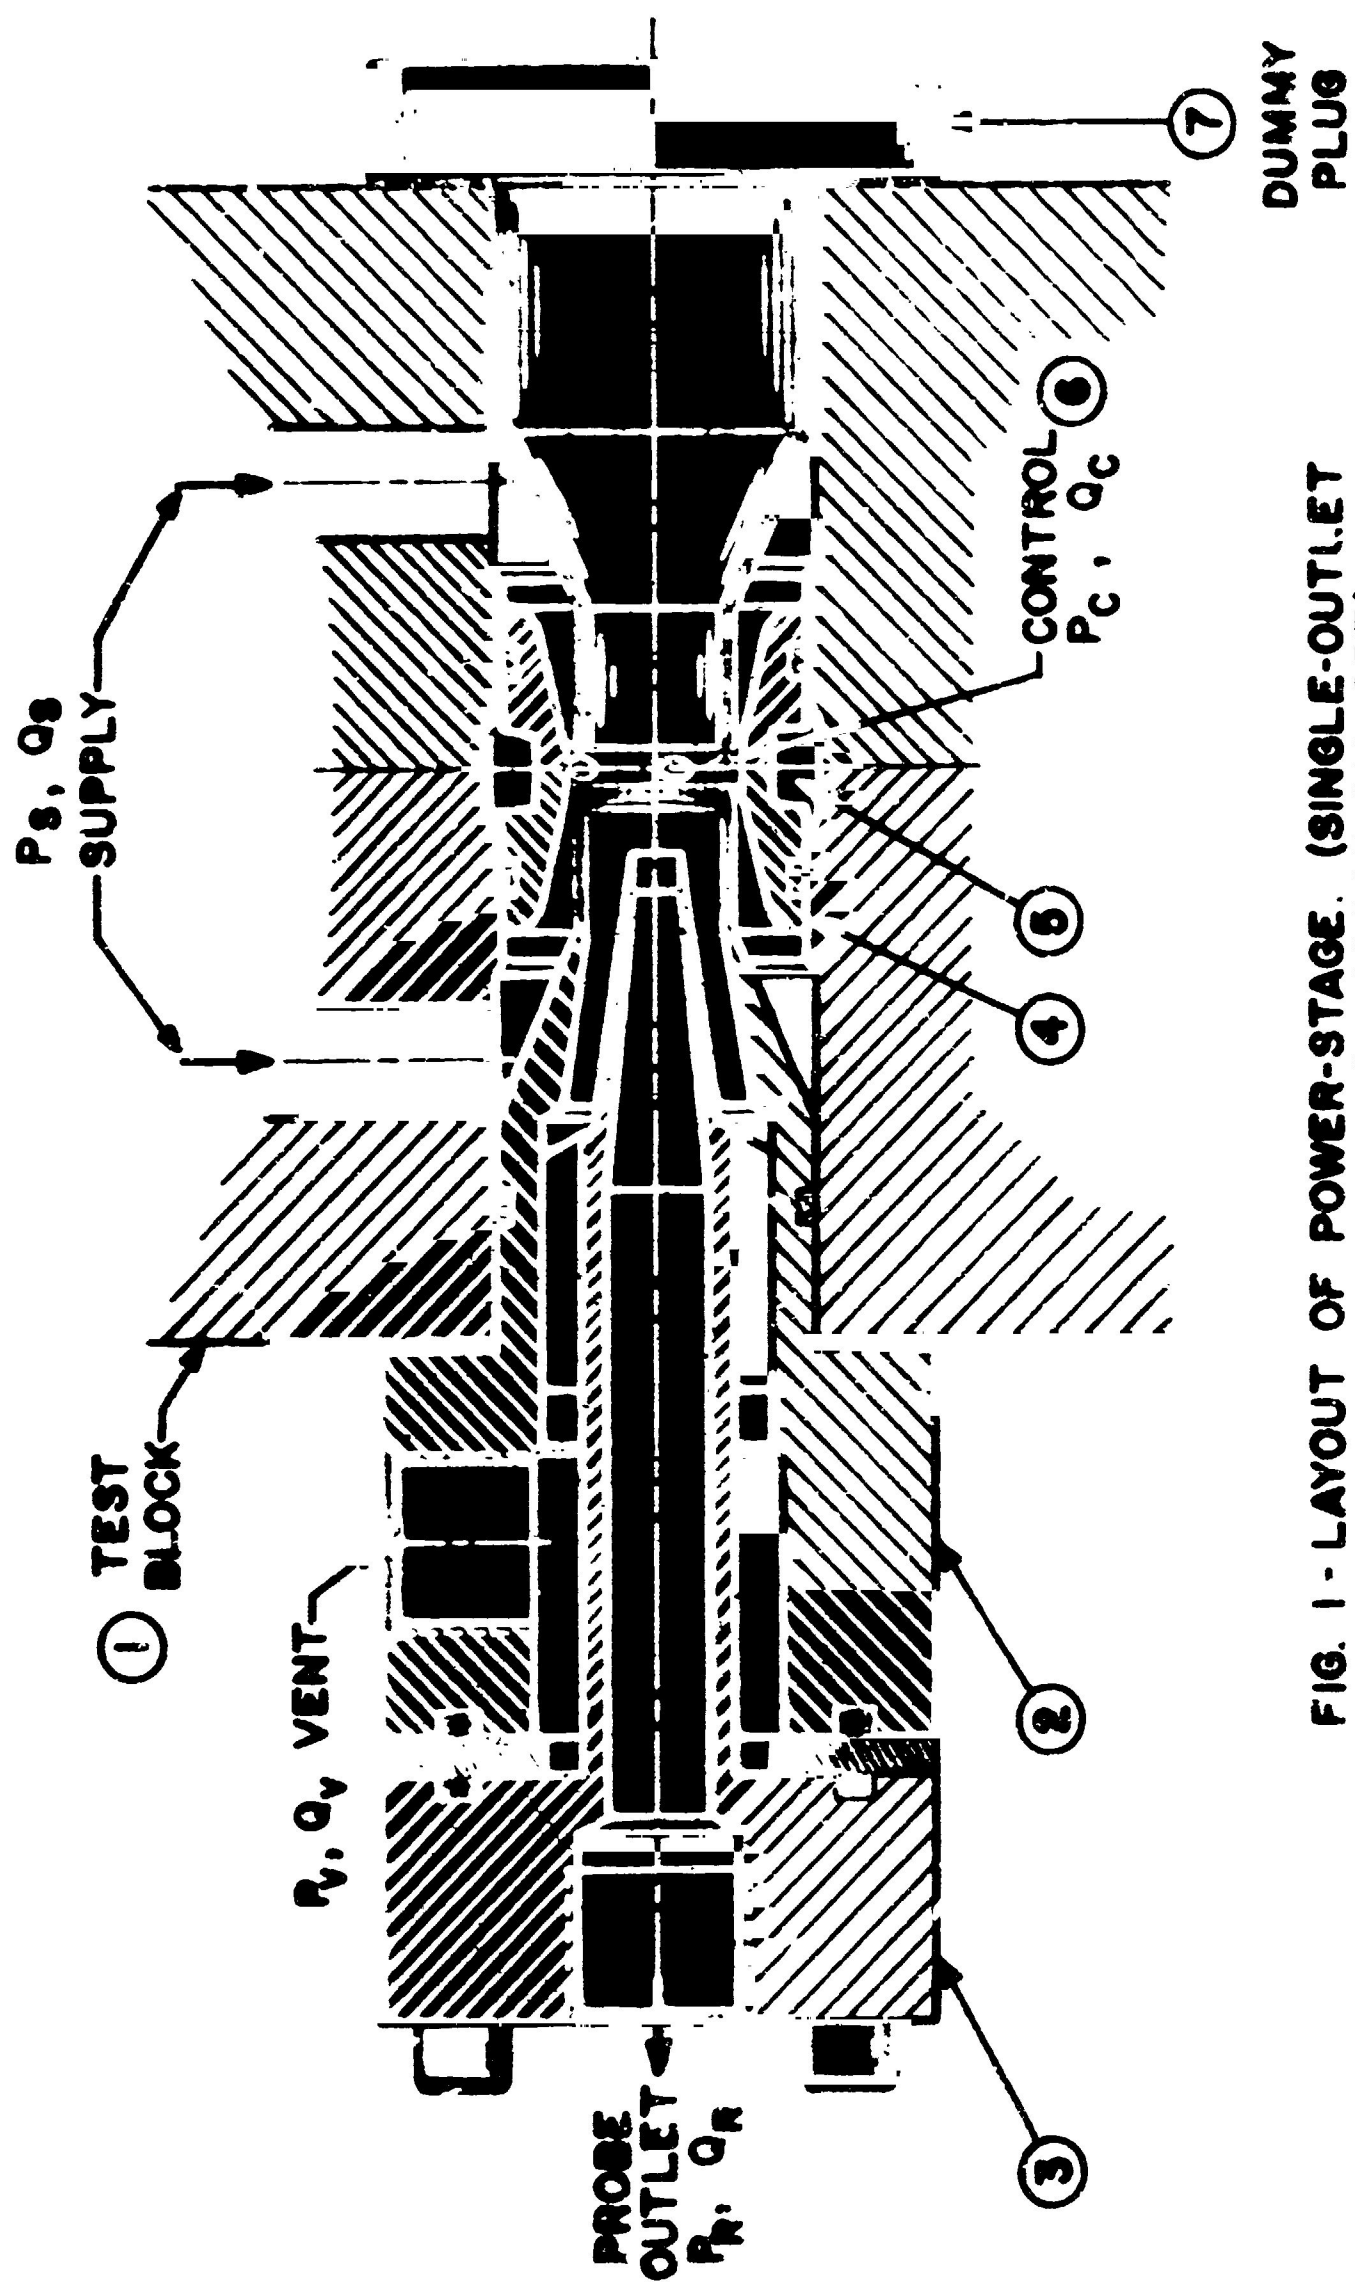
LAYOUT OF POWER-STAGE. (SINGLE-OUTLET VORTEX VALVE WITH PROBE PICKOFF)
